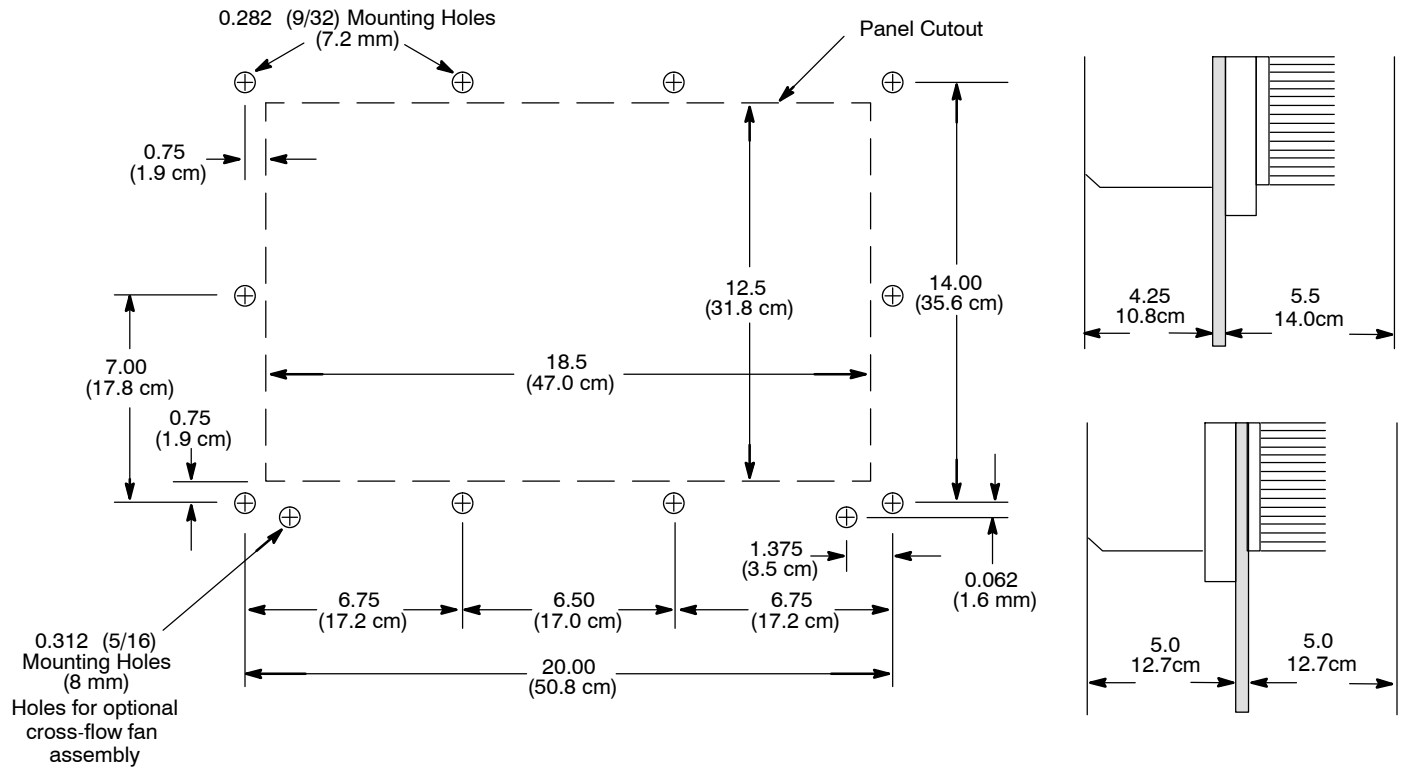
CWM Three-Position Mounting Plate Mounting Dimensions
